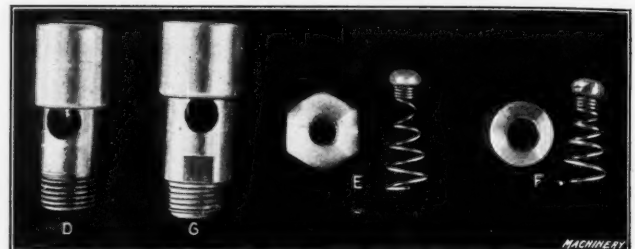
Styles D, E, F and G of Tucker Oil Hole Covers shown Open
